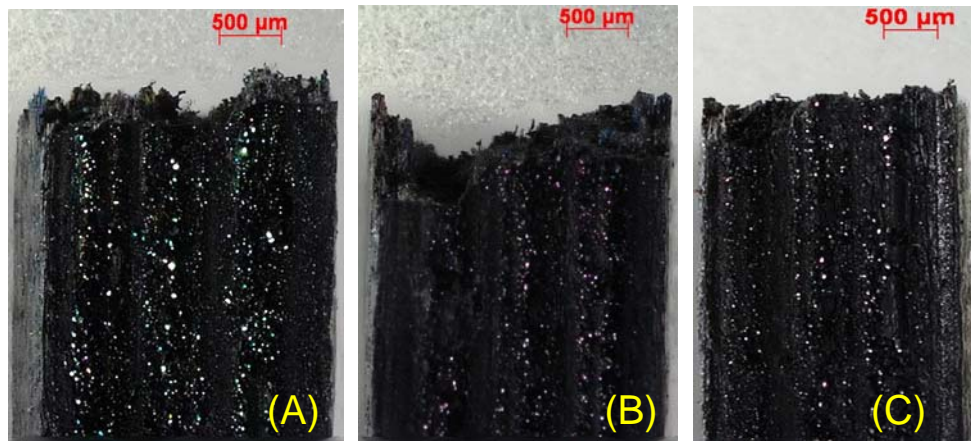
Fracture surfaces of composite C2 specimens obtained in fatigue testing in air at 1300 °C, Maximum Fatigue Stress Level: (A) 180 MPa, (B) 160 MPa), and (C) 140 MPa.
